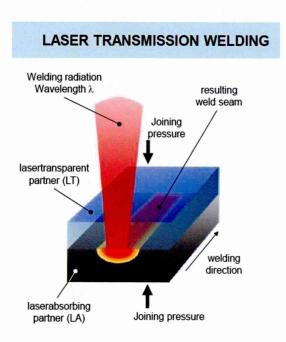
Laser Transmission Welding (Optics 2013).
